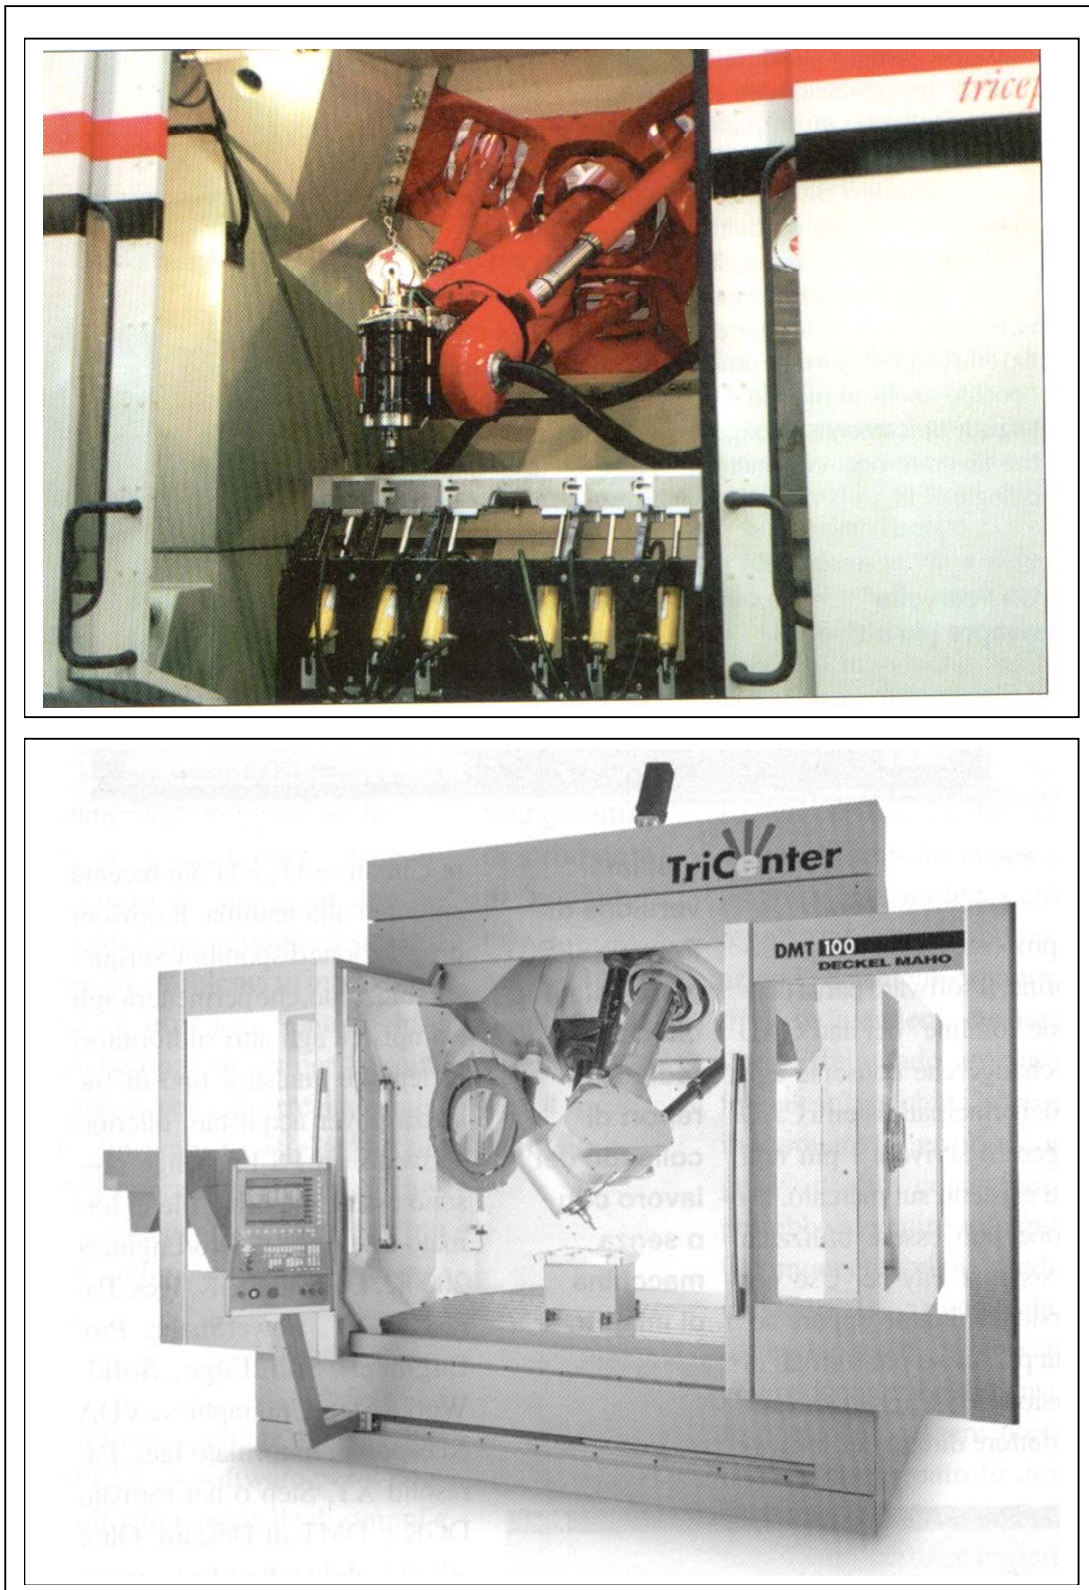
, [4] – Tricenter Machine with Tripod Milling Head
